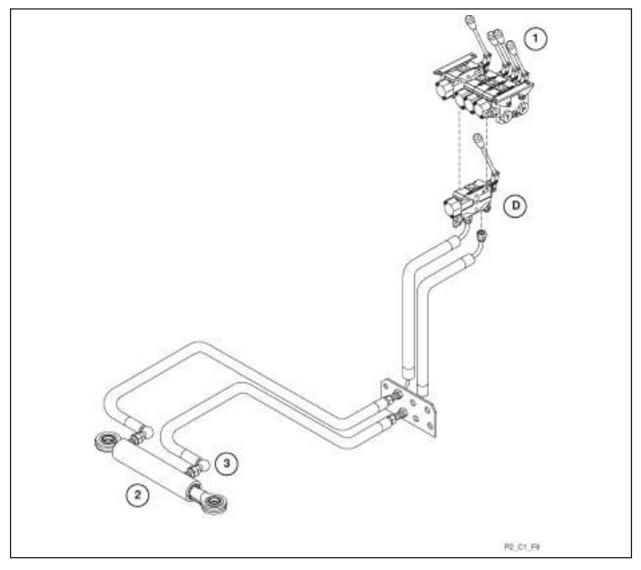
SIDE SHIFT CIRCUIT COMPONENT LAYOUT
